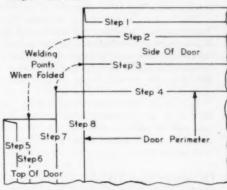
MULTIPLE METAL bending is needed for making a rigid door of this size. This layout shows one of the door corners notched out, doubled up metal, and three bends
